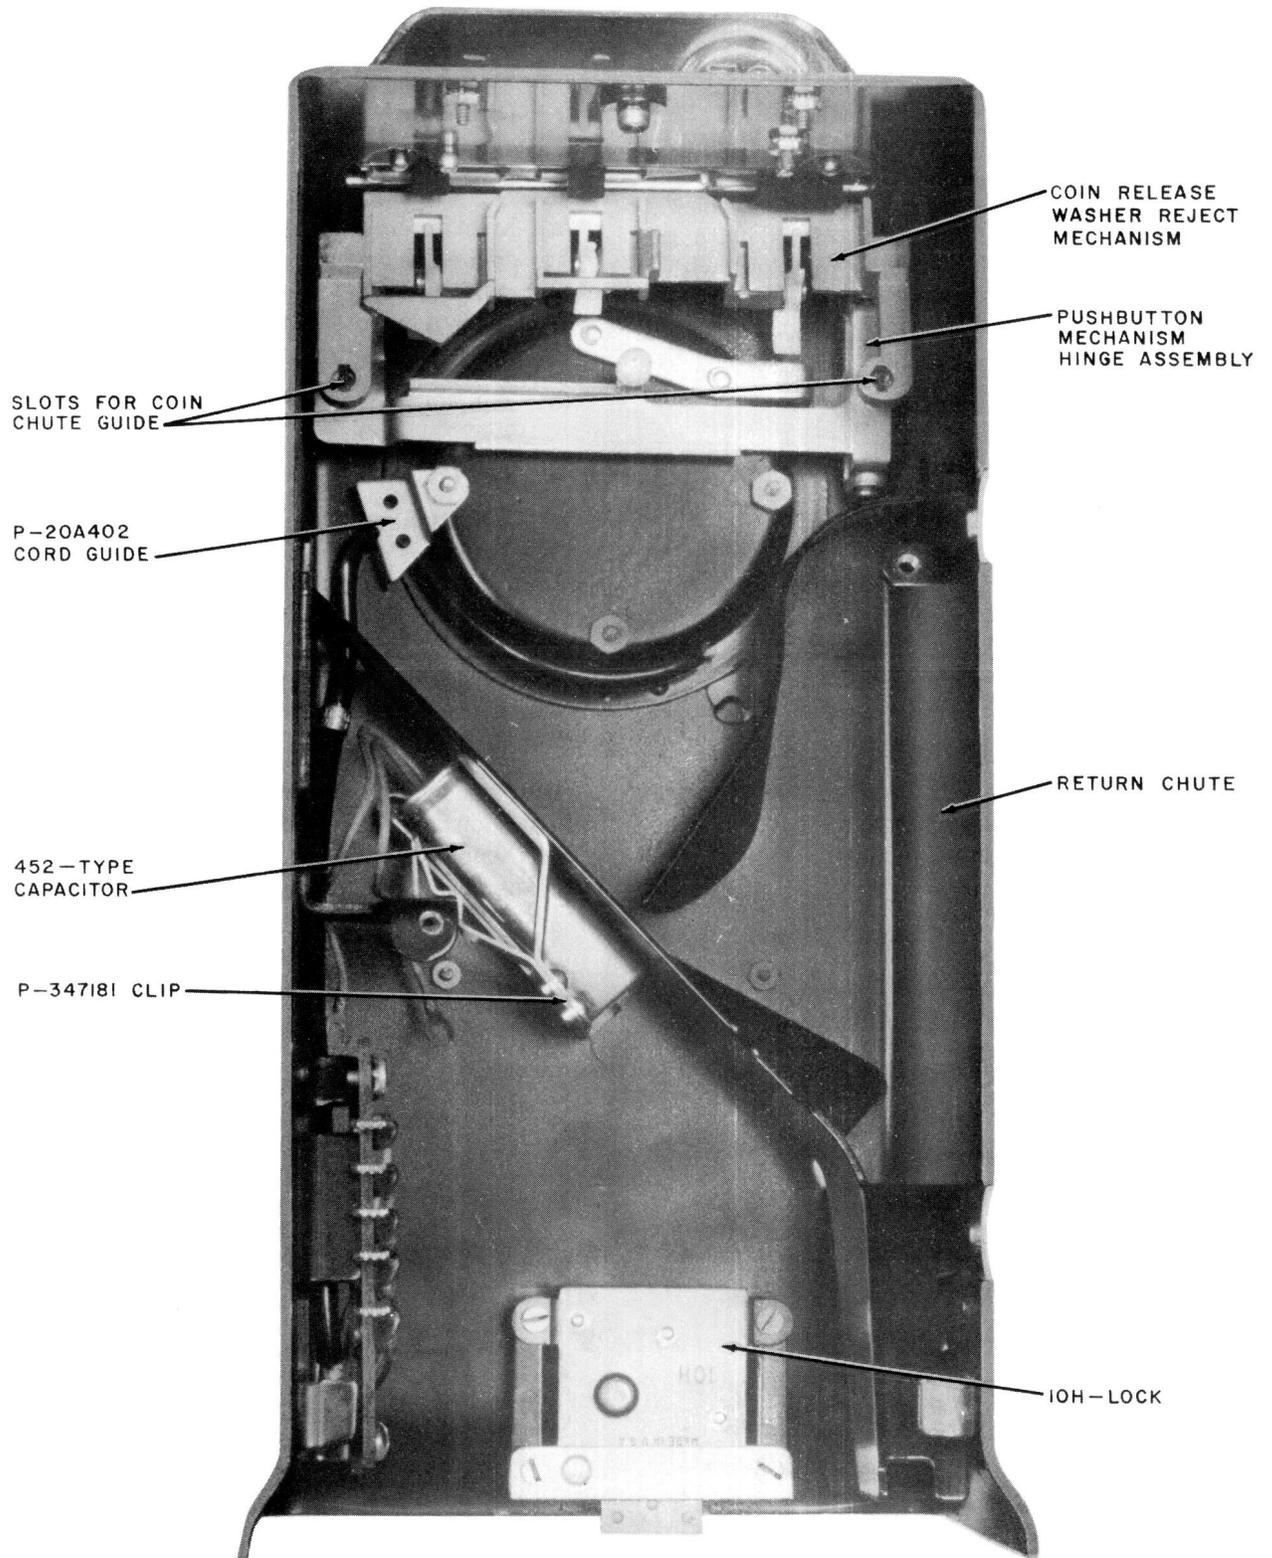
Upper Housing, Coin Chute Assembly Removed
